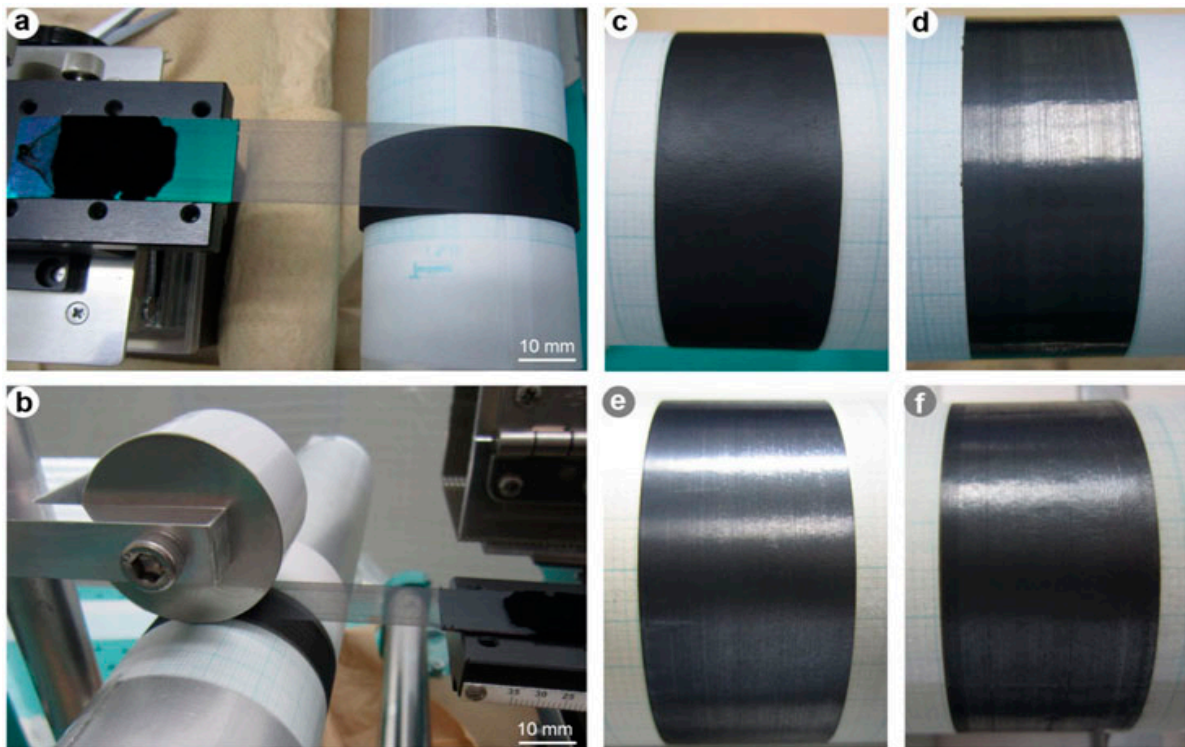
The CNT sheet processing: (a) Drawing and winding technique; (b) Drawing, winding, and pressing process; (c) non-pressed CNT sheet; (d, e, and f) pressed CNT sheets under corresponding press loads of 147, 221, and 294 N/m.
